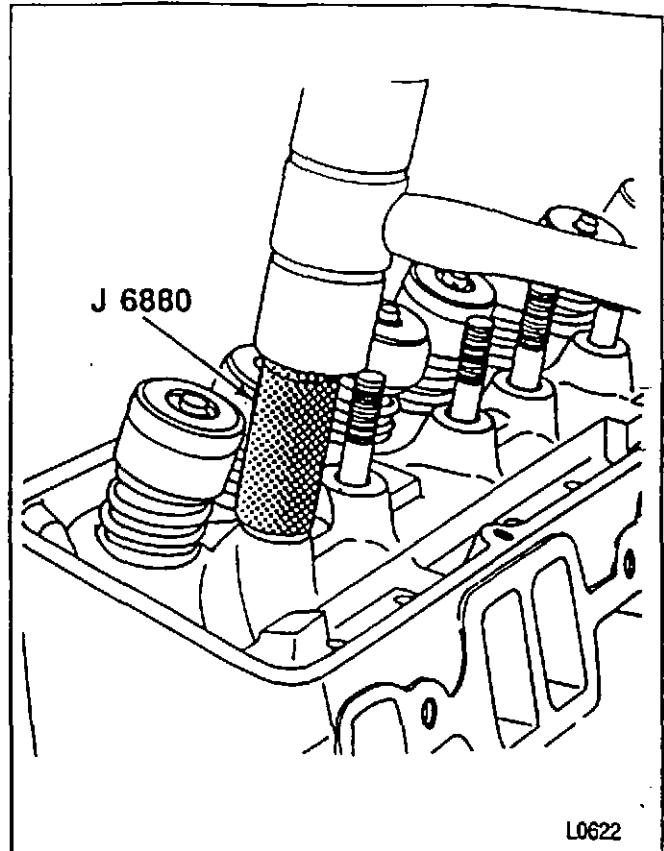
Installing the Rocker Arm Stud (5.0L and 5.7L Engines)
